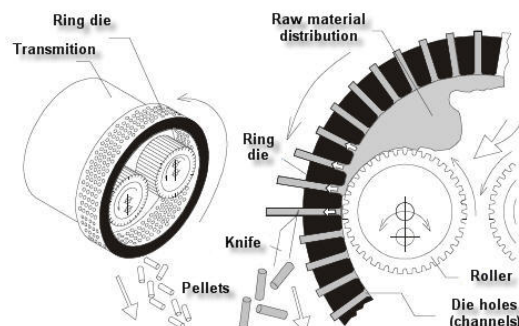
Designs and operating principles of pellet mills-Ring die pellet mill [6]
